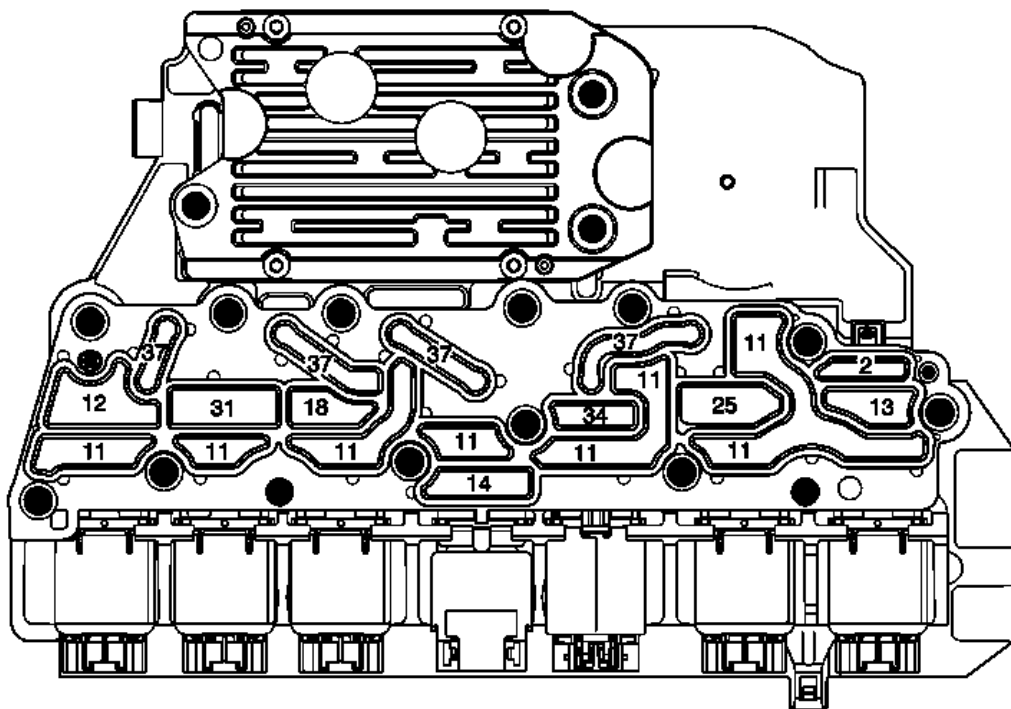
Control Solenoid (w/Body and TCM) Valve Assembly -- Channel Plate Side
